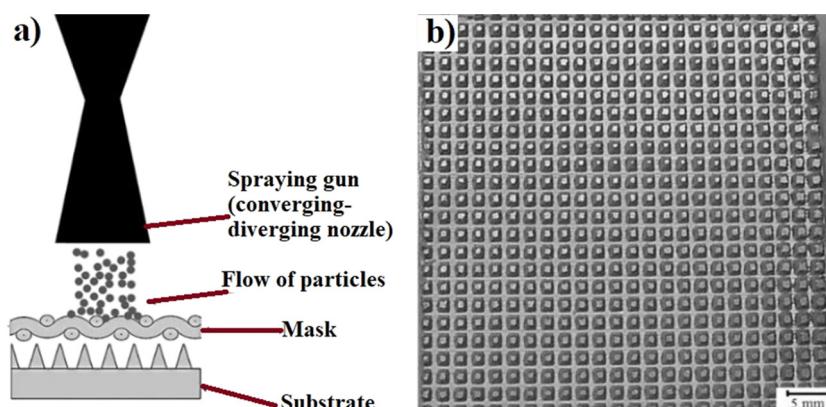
CSAM pyramidal fin arrays heat sink: (a) schematic view of the manufacturing technique and (b) photograph of a CSAM fin array heat sink [57].
